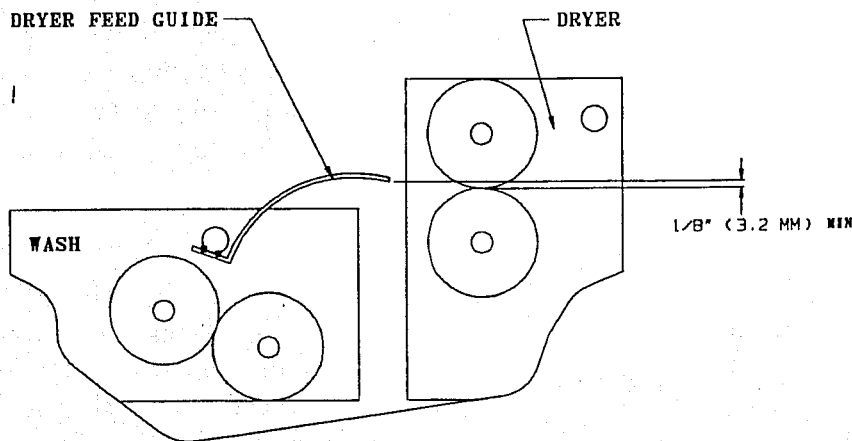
DRYER FEED GUIDE ADJUSTMENT
